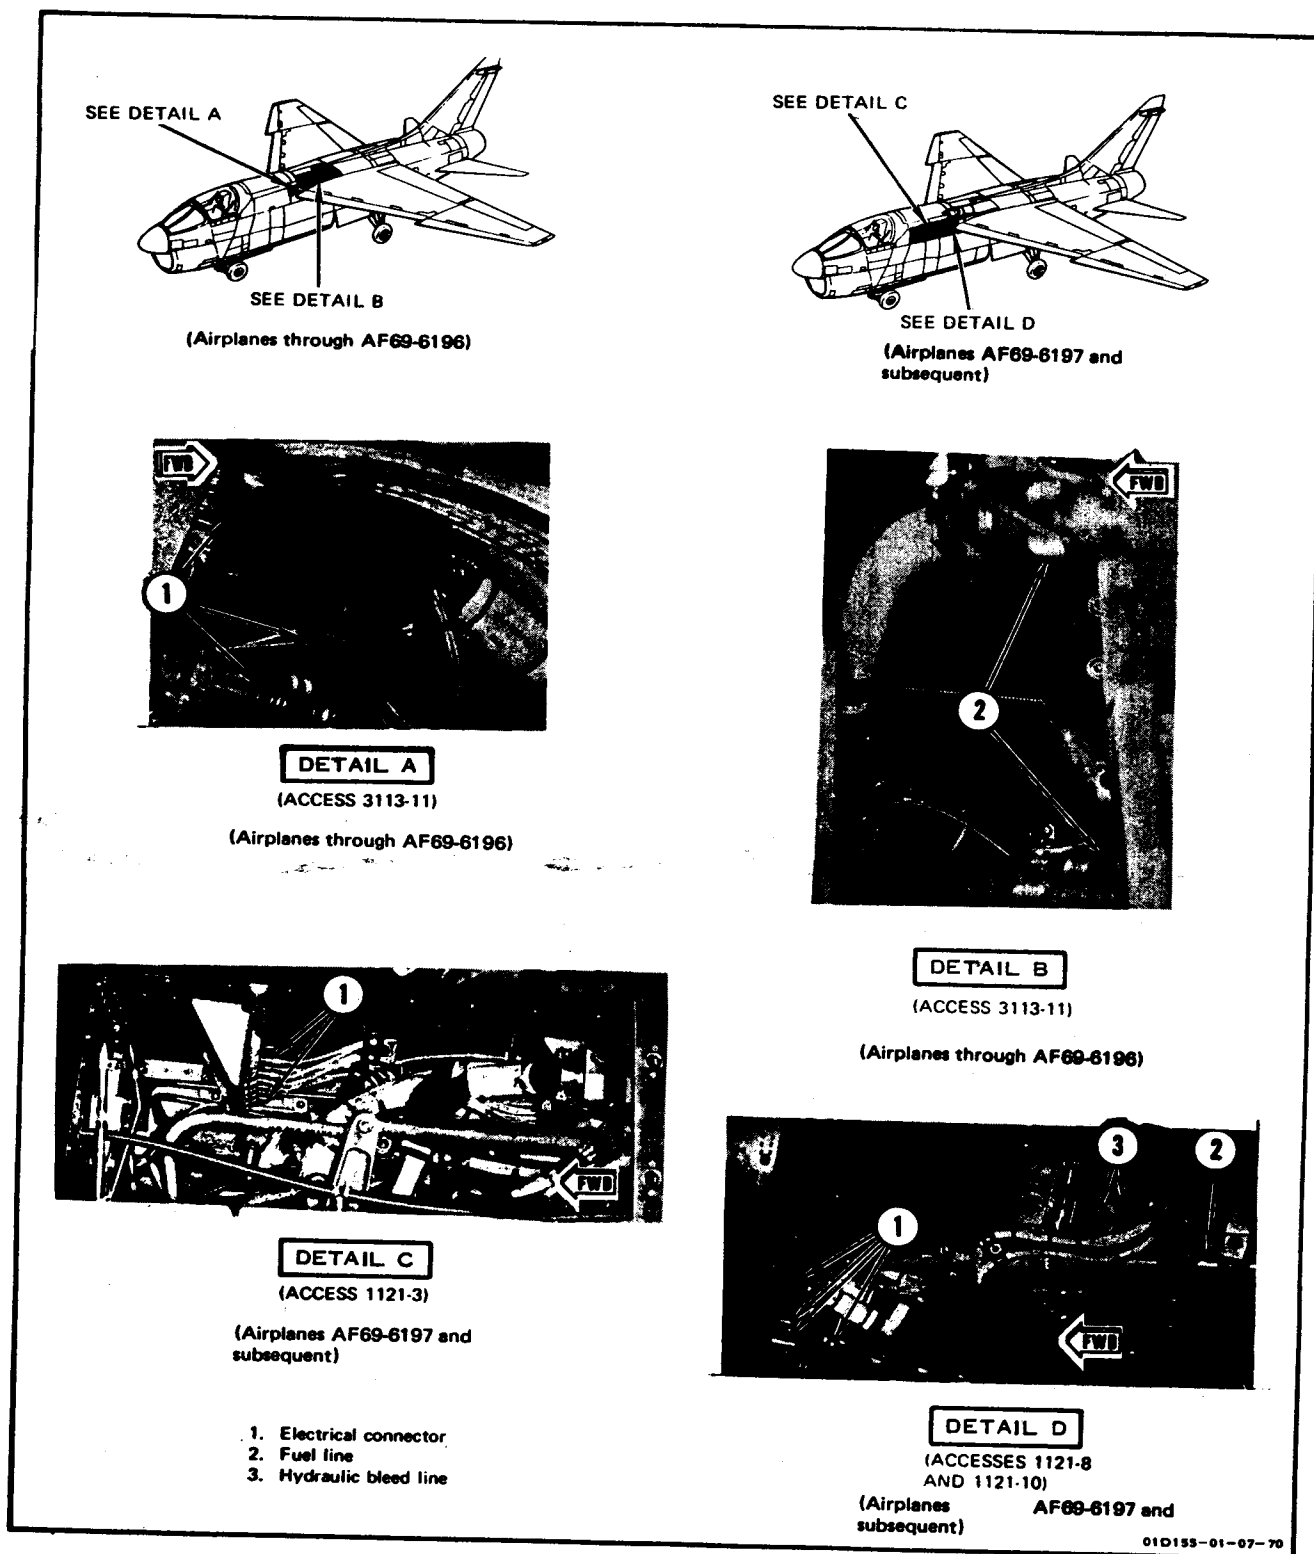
Wing Center Section Removal and Installation (Sheet 1)
